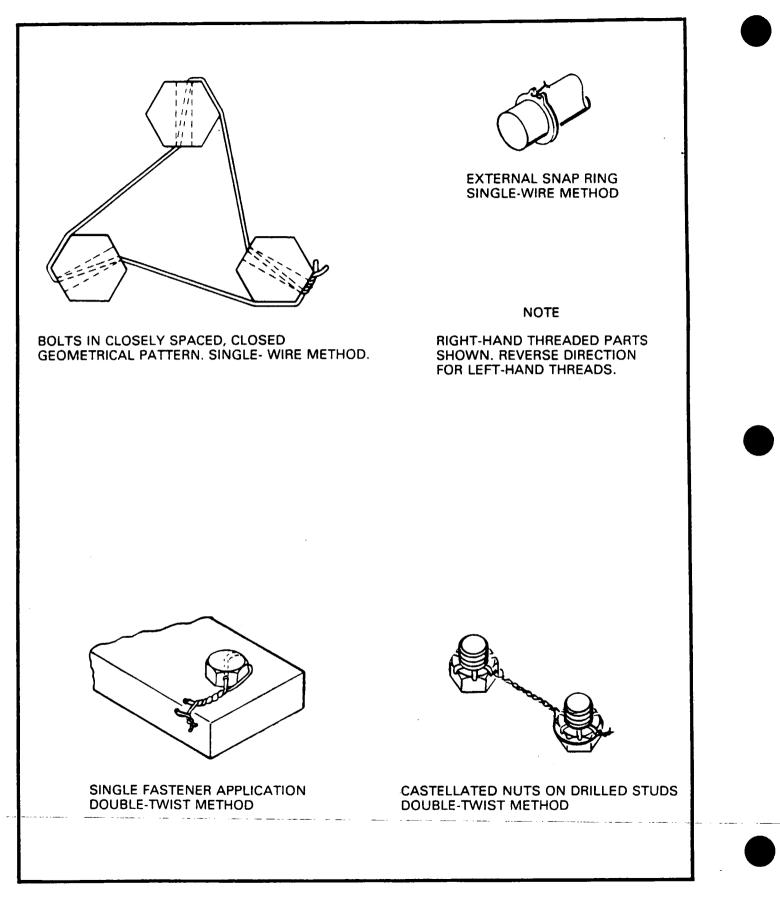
Lockwire Safetying (Sheet 1 of 2)
